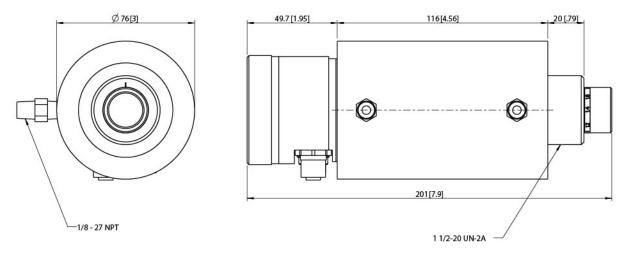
Endurance Head with Air/Water-Cooled Housing Option
